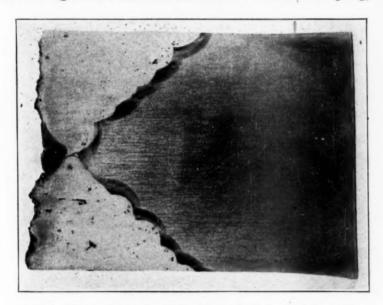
Fractured Section of Specimen 2¼ in. in Diameter, 45-deg. Double-Cone Weld.
